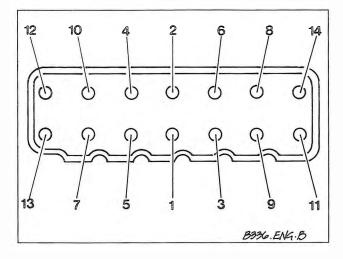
Cylinder head bolt tightening sequence for 6cylinder engine.
